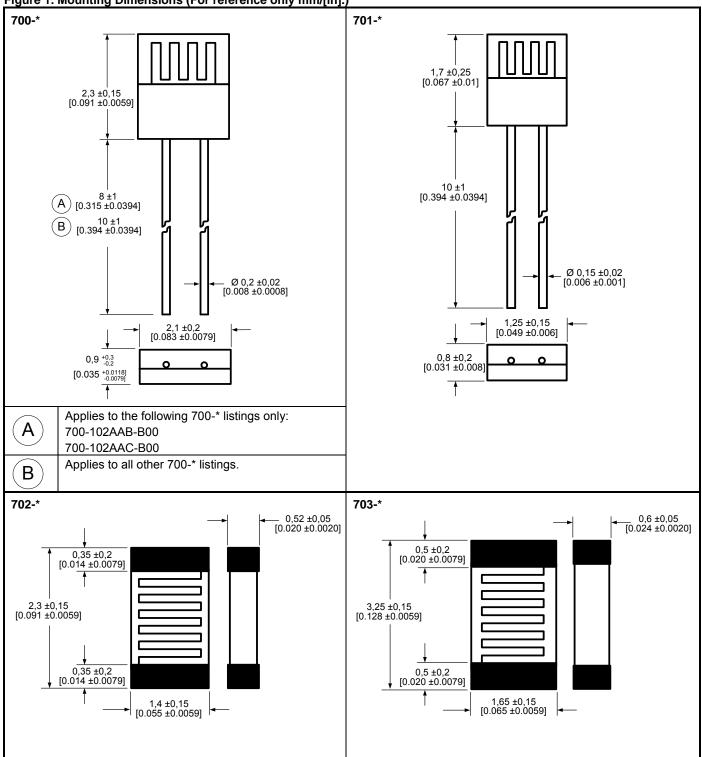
Mounting Dimensions (For reference only mm/[in].)
